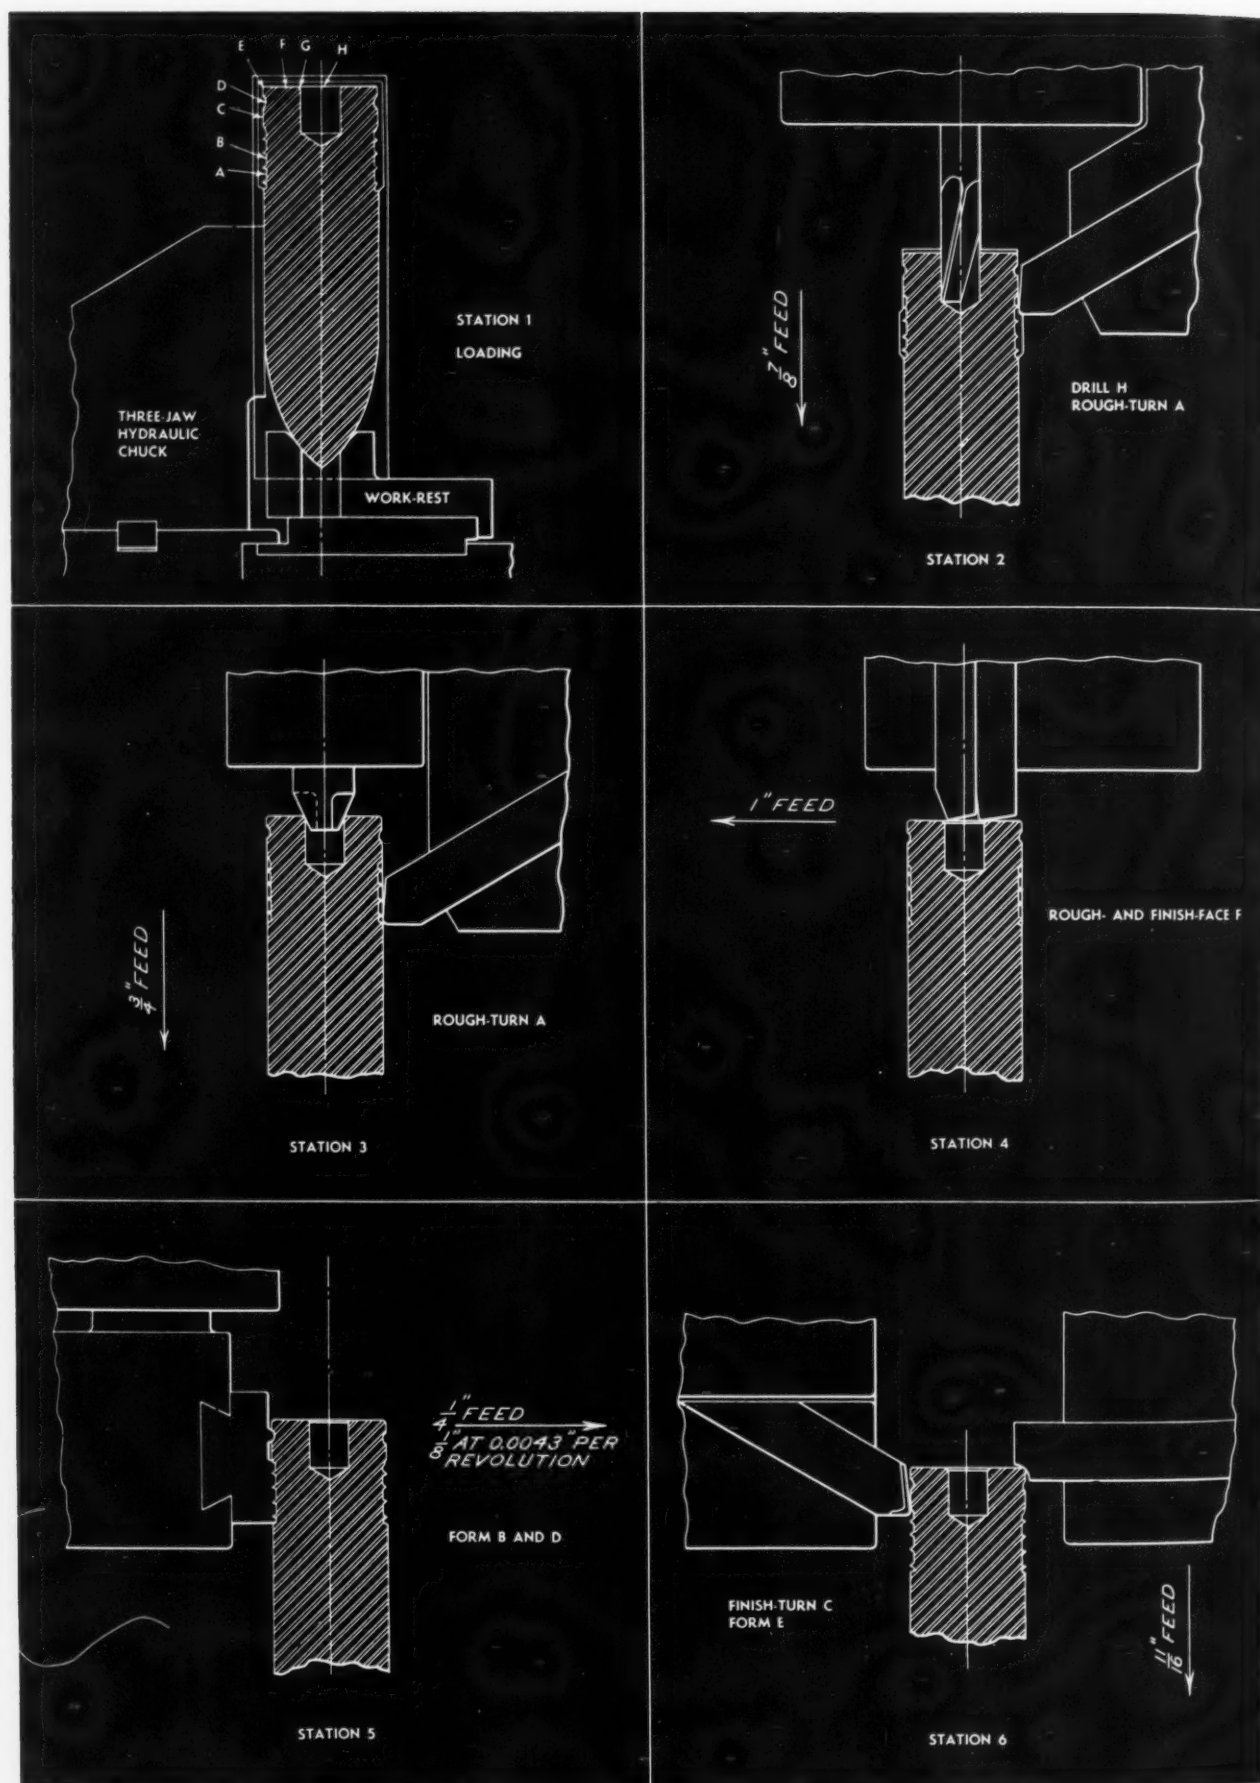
Machining Operations on Base Section of 37-millimeter Armor-piercing Shot
